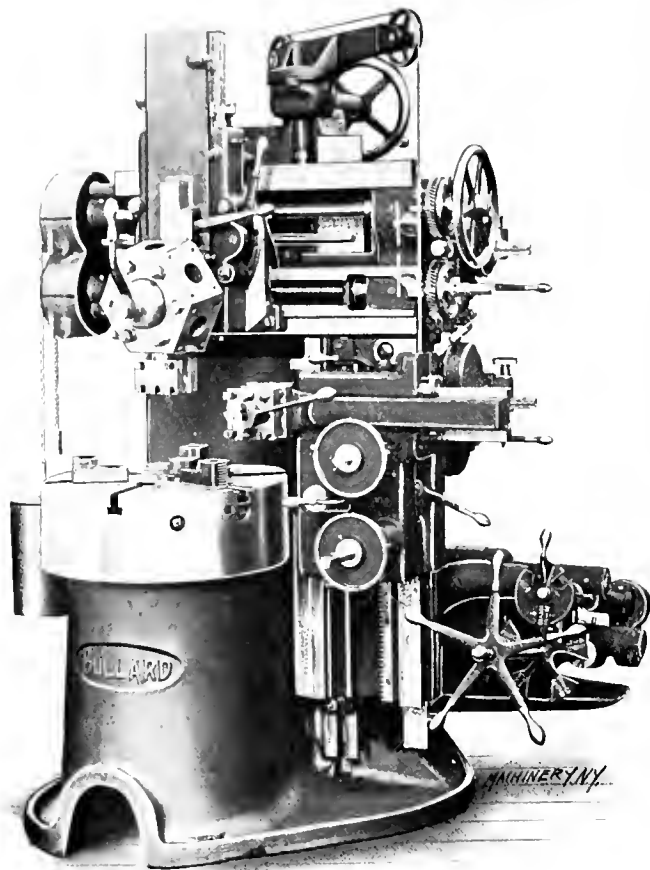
Front View of the Bullard 24-inch Vertical Turret Lathe.
